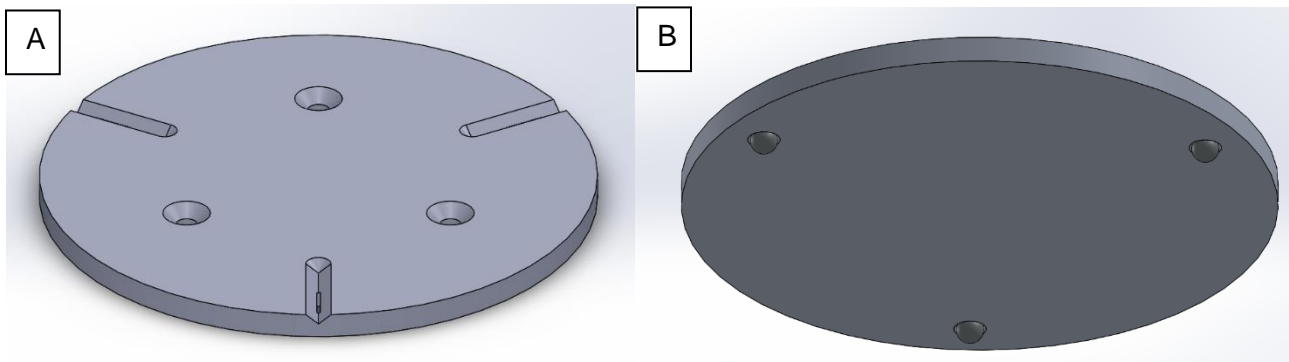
Kinematic coupling system. A: Bottom fixture for XY stage. (Bottom fixture for NewView is not pictured but has the same 3 grooves). The plate for the stage (pictured) matches the hole pattern on the b-axis. The plate for inspection (not pictured) will match the NewView stage hole
